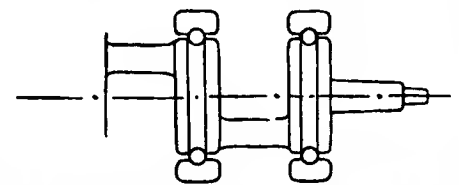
SPECIAL CRANKSHAFT BALL BEARINGS OF DUTCH CAR.
